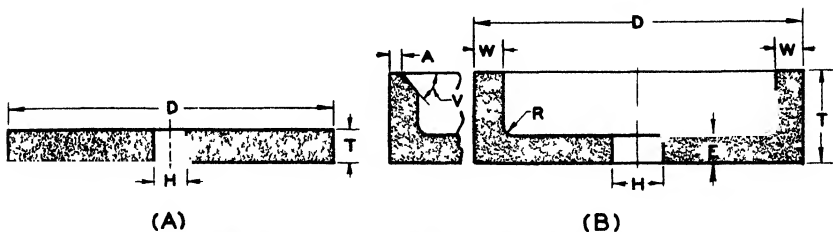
The Straight Grinding Wheel (A) and the Cup Wheel (B)
